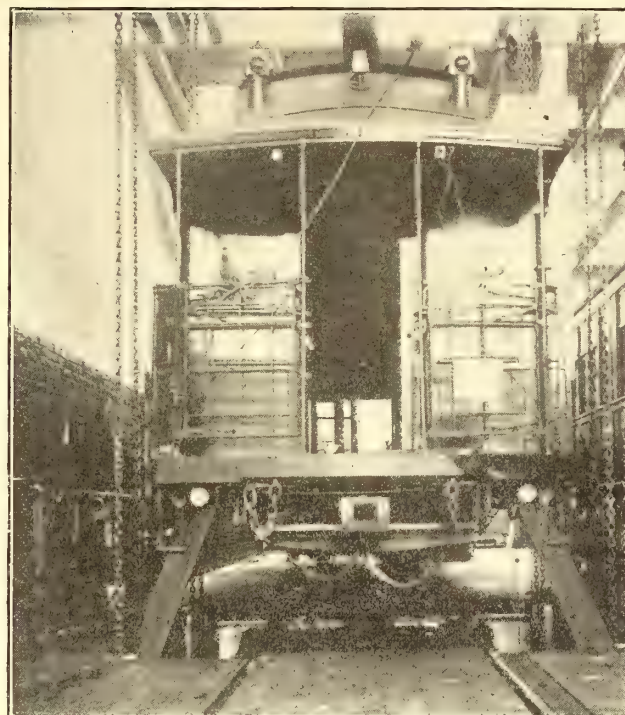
WOODEN STRUTS USED IN THE EAST NEW YORK SHOPS TO HOLD UP CAR OVER ELEVATOR WHILE TRUCK IS BEING REPLACED BY A DUMMY
